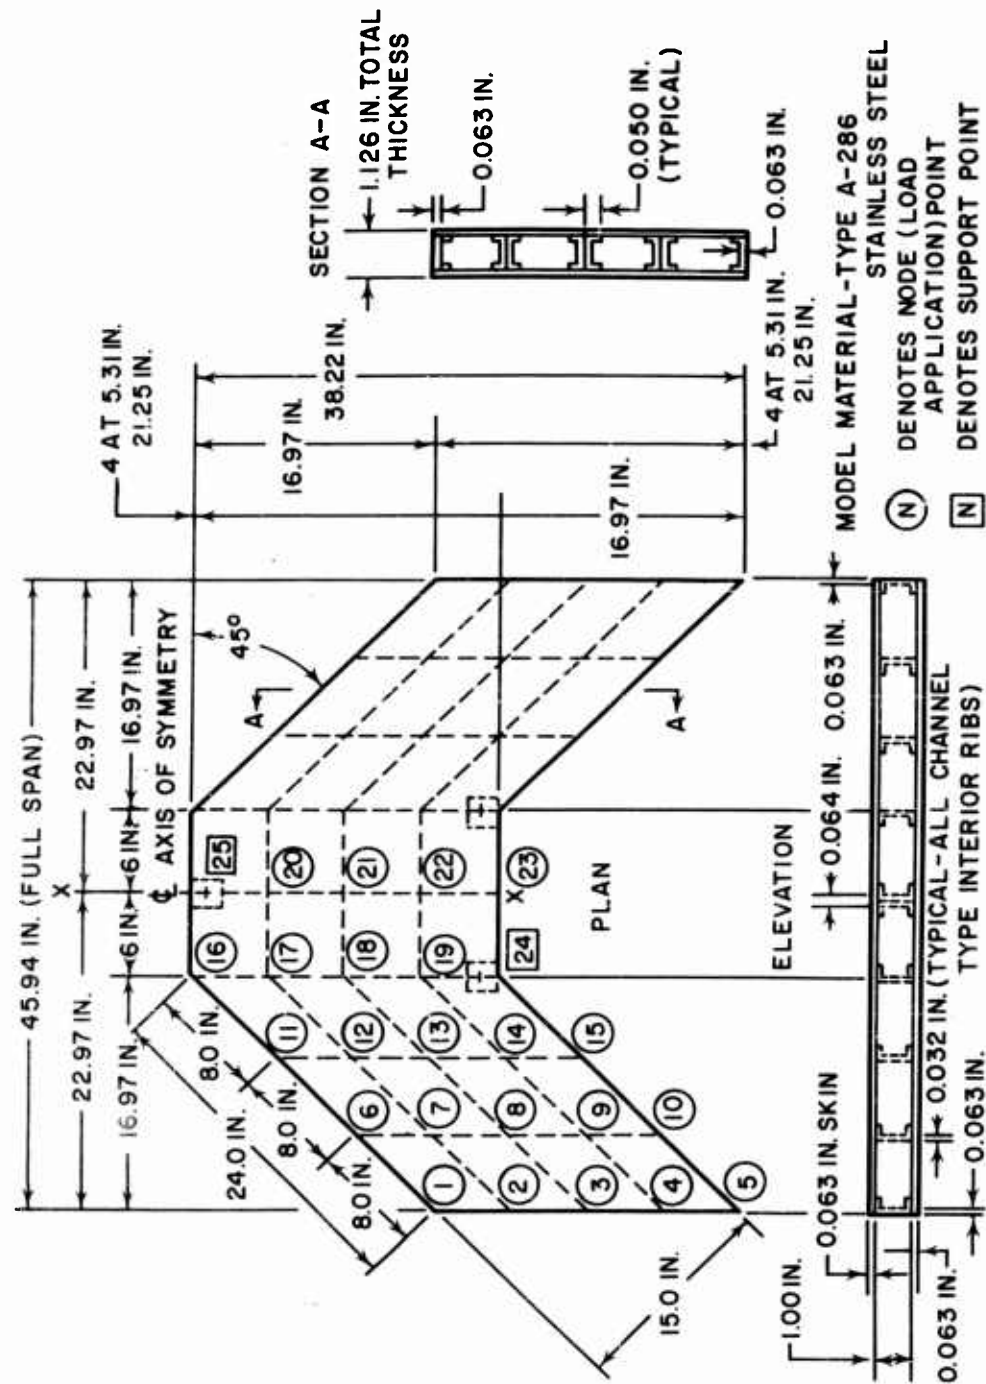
SECOND HEATED WING MODEL - GEOMETRY, DIMENSIONS, AND NODE POINTS
